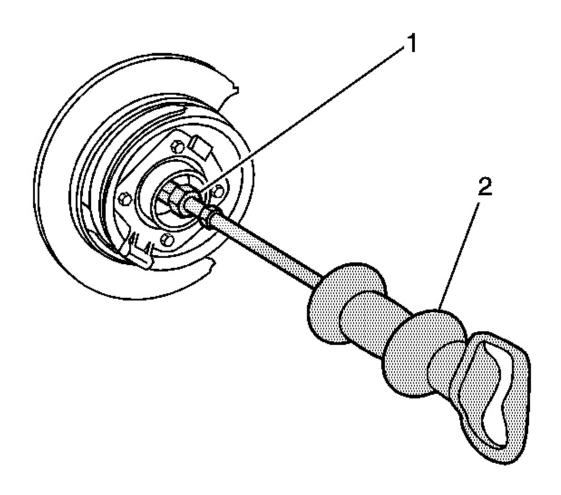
The Wheel Speed Sensor Ring From The Axle Housing Courtesy of GENERAL MOTORS CORP.
